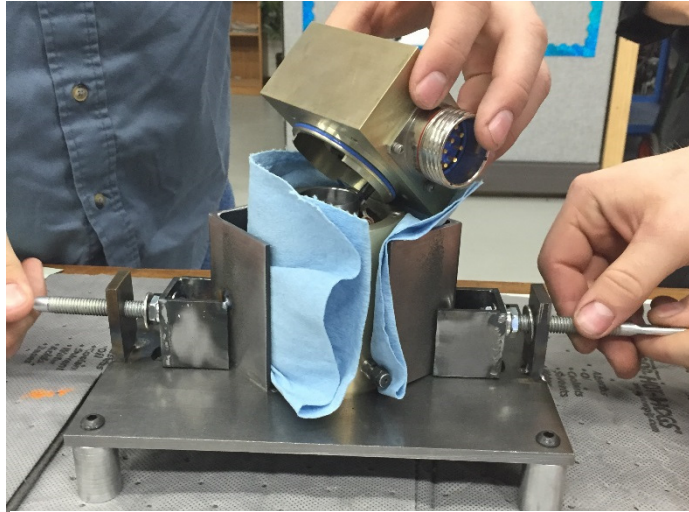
The motor housing positioned on the vertical centered rod prototype.
